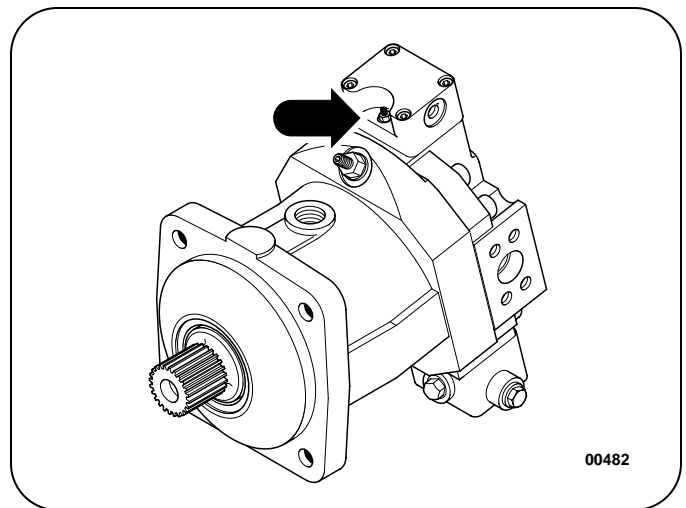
Wheel Drive Motor Begin Of Stroke Adjustment
